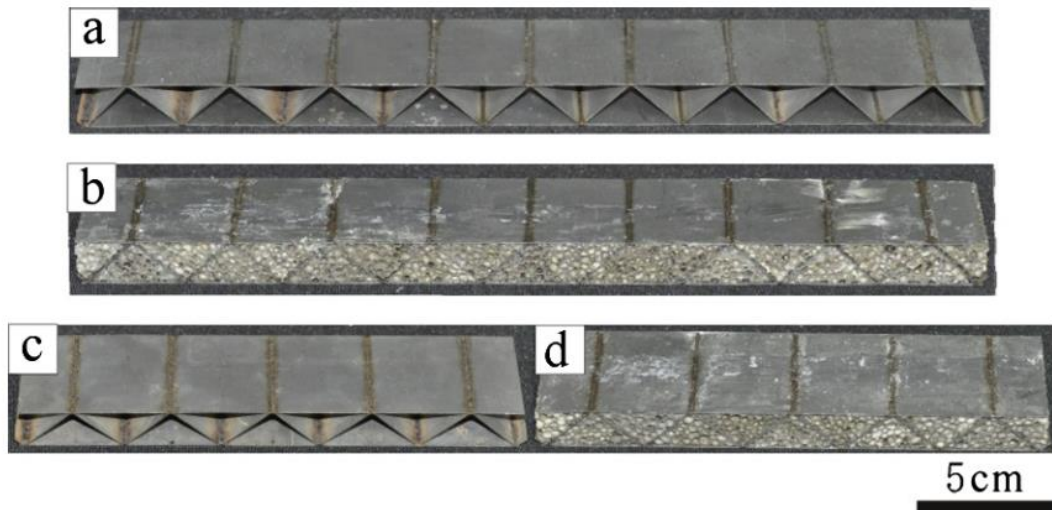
Typical as-fabricated empty and aluminum foam-filled sandwich beams with corrugated cores. Long beam: (a) empty; and (b) filled. Short beam: (c) empty; and (d) filled [25].
